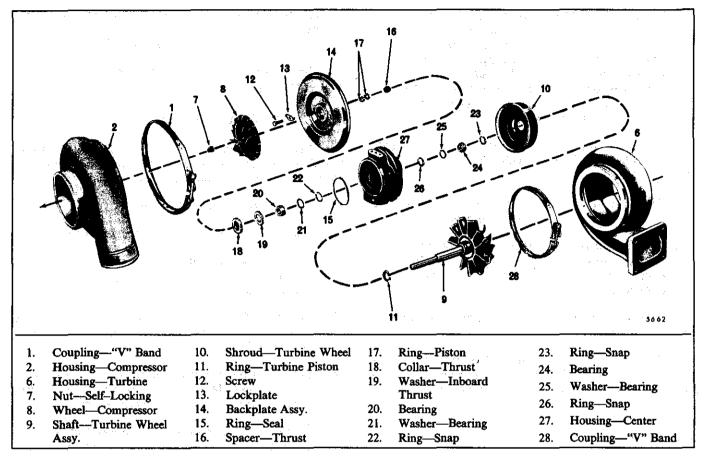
TV61 Turbocharger Details and Relative Location of Parts.
